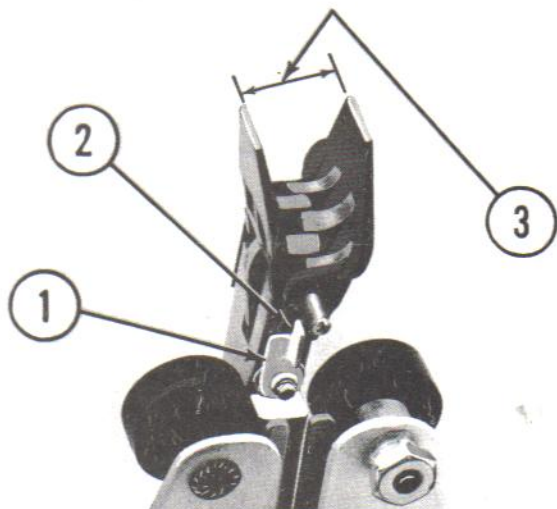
BRACKET AND ROLLER ASSEMBLY, LIFT ARM GUIDE, 2500
